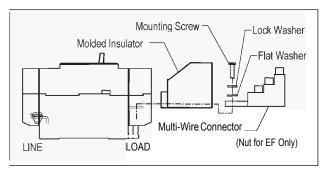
T Multi-Wire Terminal Connector Kit Installation Layout
